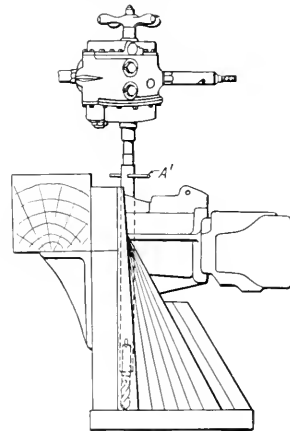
Using the Drill Extension in Drilling a Pilot Heel Plate
